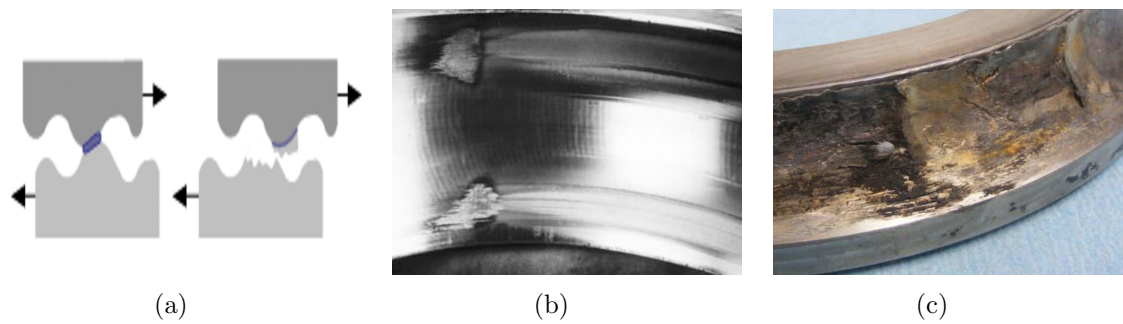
(a) Mechanisms of adhesive wear, (b) smearing of bearing outer ring [64] and (c) galling of bearing outer ring [64].
